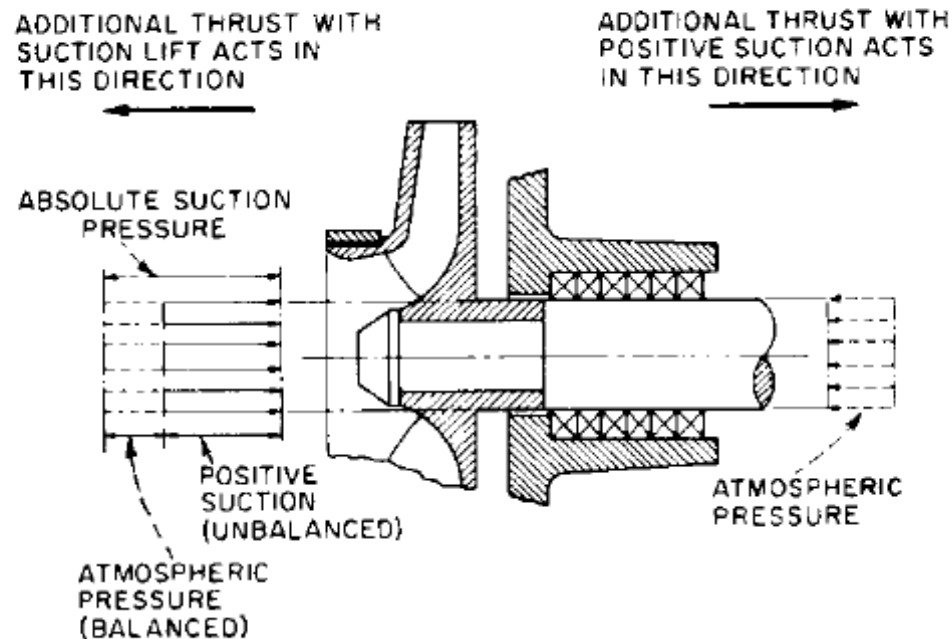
An axial thrust problem with a single-suction, overhung impeller and a single stuffing box or seal chamber
